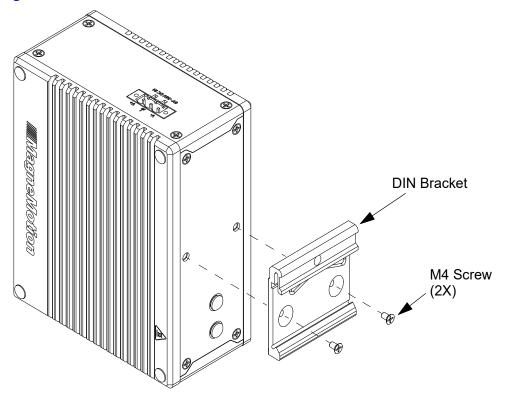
NC-E Series B Node Controller DIN Rail Mounting
